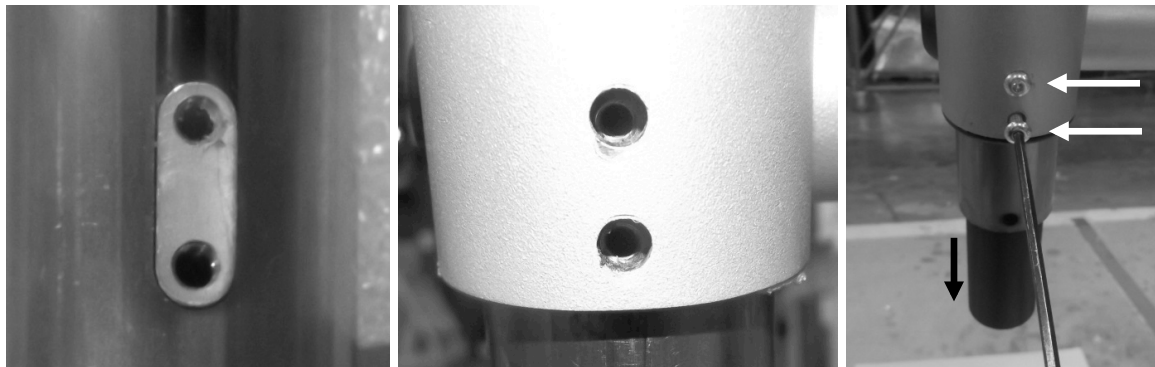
Gas Spring Mounting Block Screw Holes (Left), Seat Female Tube Assembly Screw Holes (Center), and Two 10 × 32 Screws along with Mounting Block Stopper (Right).
